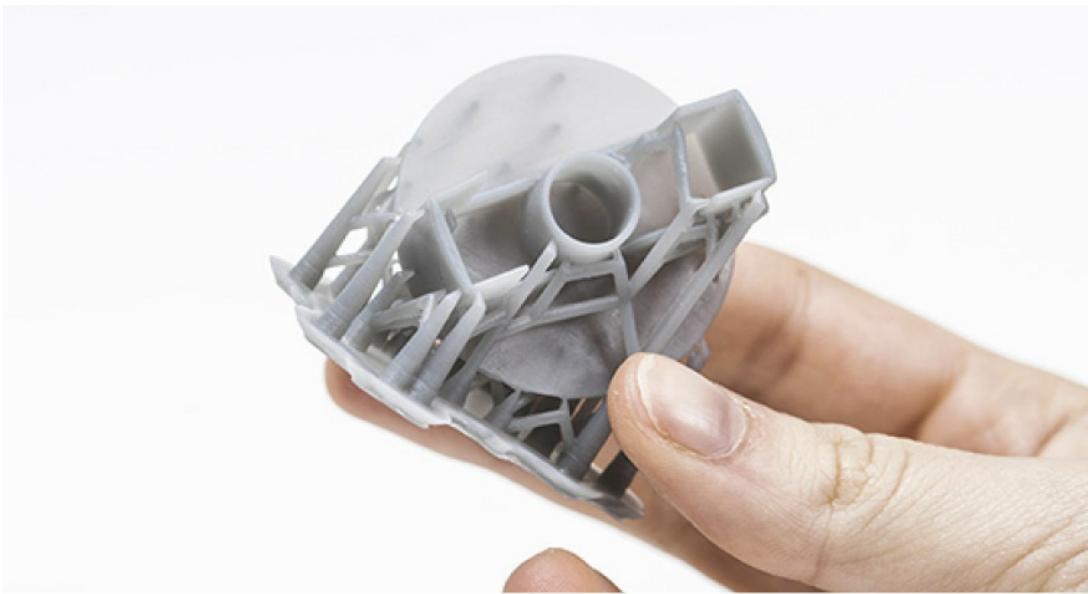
The shaft end cap after being removed from the build platform with support structures still attached
